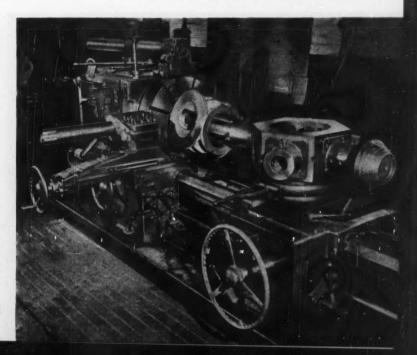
Turret lathe equipped for performing rough- and finish-boring, facing, and tapping operations on large valve bodies.
